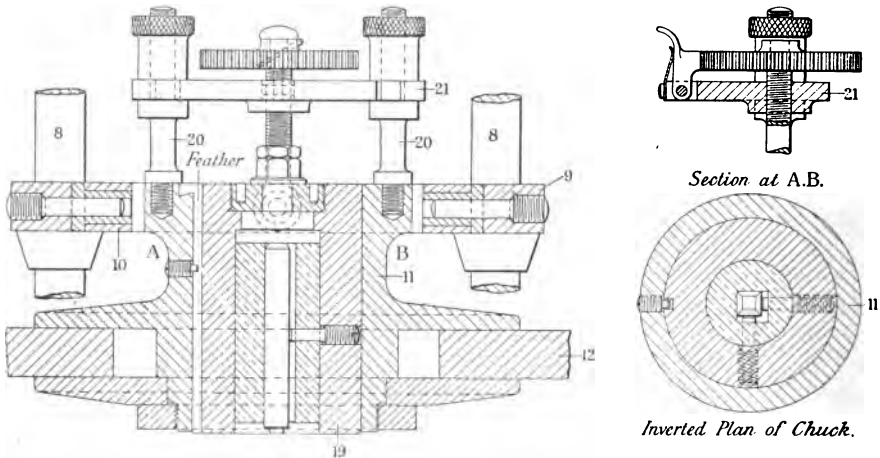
Punch-Cutting Machine (Benton-Waldo).
